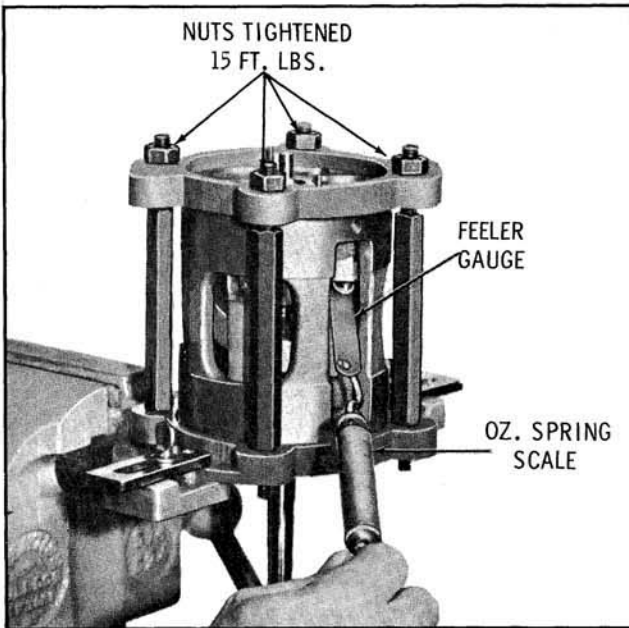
Checking Drive Ball to Swash Plate Clearance
